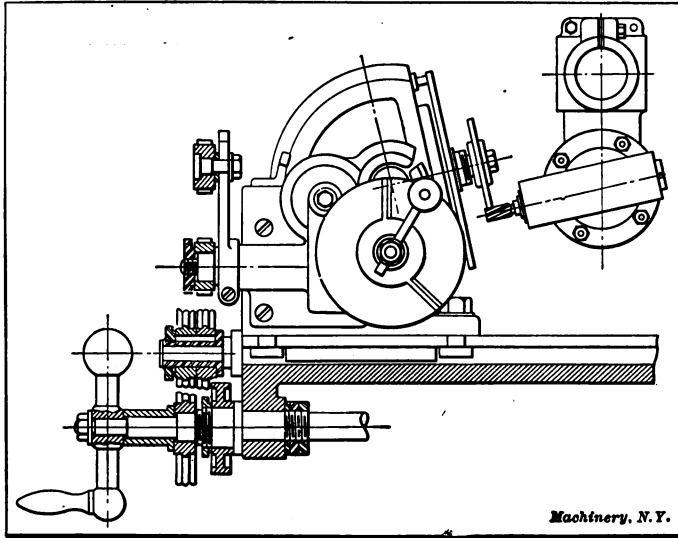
Diagrammatical View showing Method of Milling Cams on the Milling Machine
